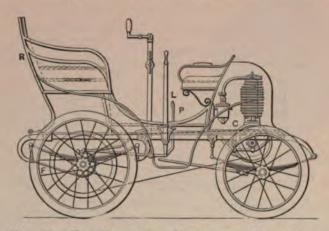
THE UNDERBERG VOITURETTE—ELEVATION.
